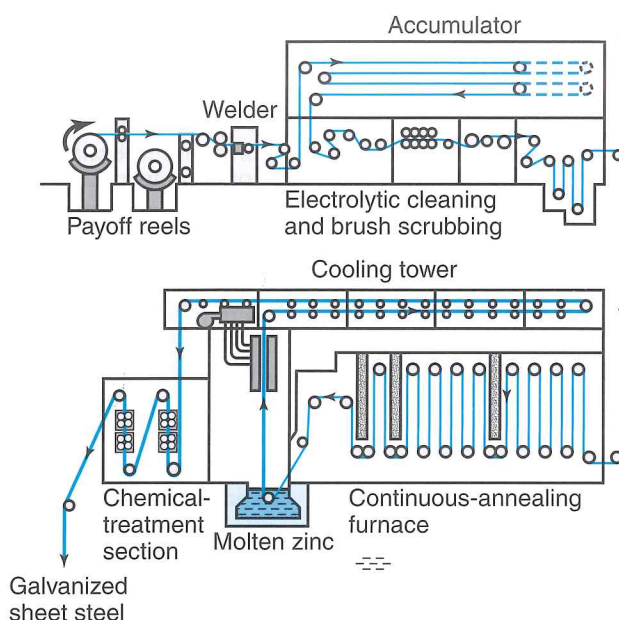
Flow line for the continuous hot-dipped galvanizing of sheet steel; the welder (upper left) is used to weld the ends of coils to maintain continuous material flow. *Source:* Courtesy of American Iron and Steel Institute.
